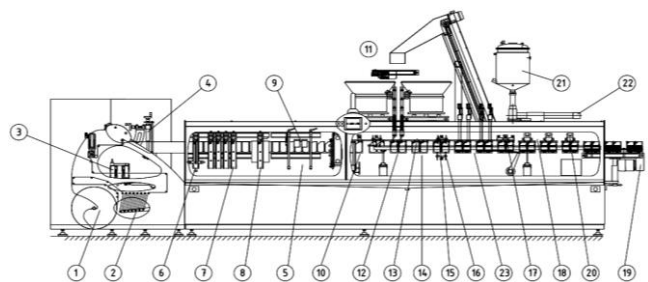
Multi-position automatic machine (MPAM) for packaging of pastes in "doy-pack" type packs: 1 – laminate roll, 2 – laminate unwinding, 3 – perforator, 4 – forming triangle, 5 – guides, 6 – bottom soldering iron with drive, 7 – mechanism of vertical welding, 8 – cooling mechanism, 9 – angular stamps, 10 – cutting mechanism (scissor), 11 – cork feeding mechanism, 12 – cork soldering irons, 13 – upper stretcher with tweezers, 14 – lower stretcher with tweezers, 15 – upper suction cups, 16 – lower suction cups, 17 – pack stretching mechanism, 18 – horizontal soldering irons, 19 – conveyor, 20 – cooling mechanism, 21 – tank with product, 22 – dispenser drive, 23 – dispensers (4 pieces) with drive
